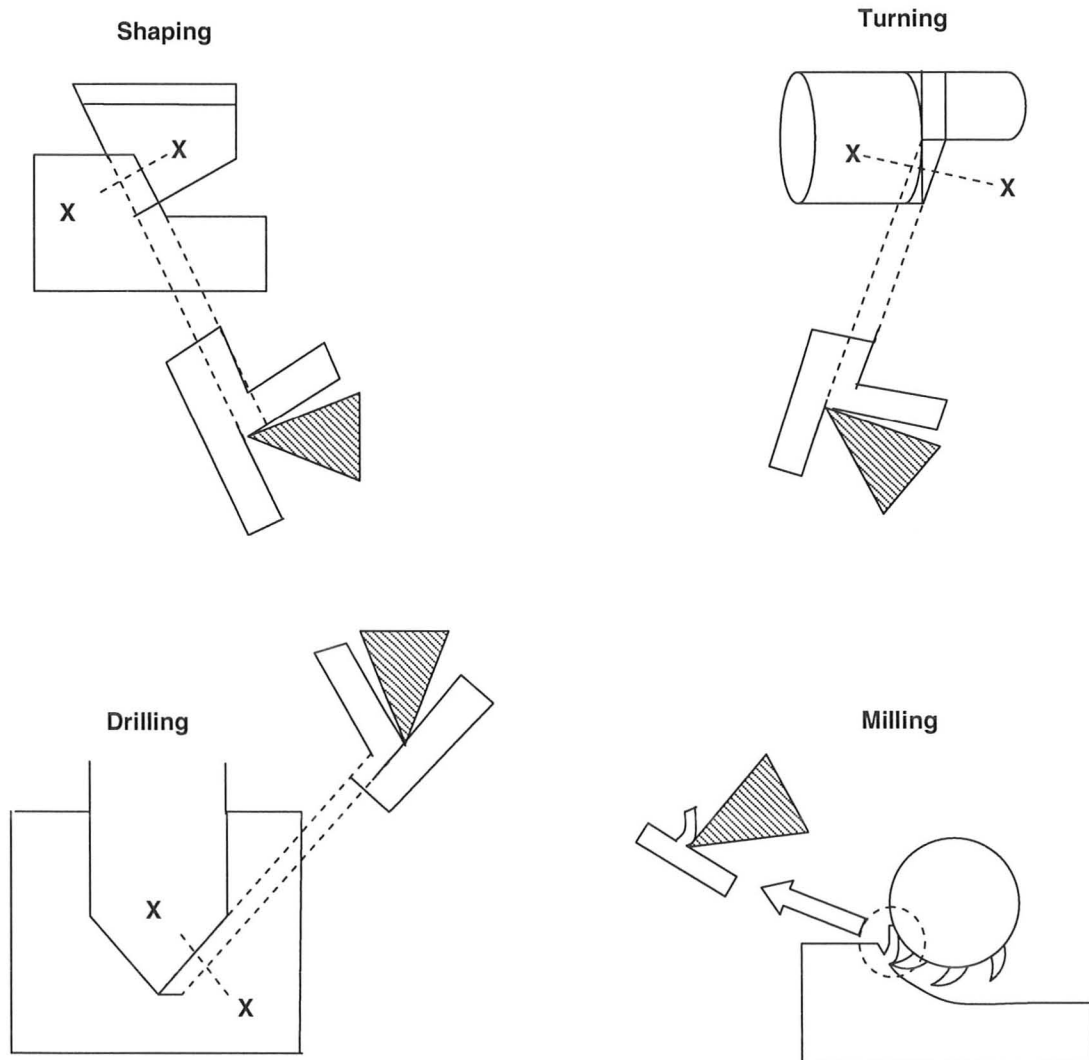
Tool and Workpiece Similarity for Various Metal Cutting Removal Processes
